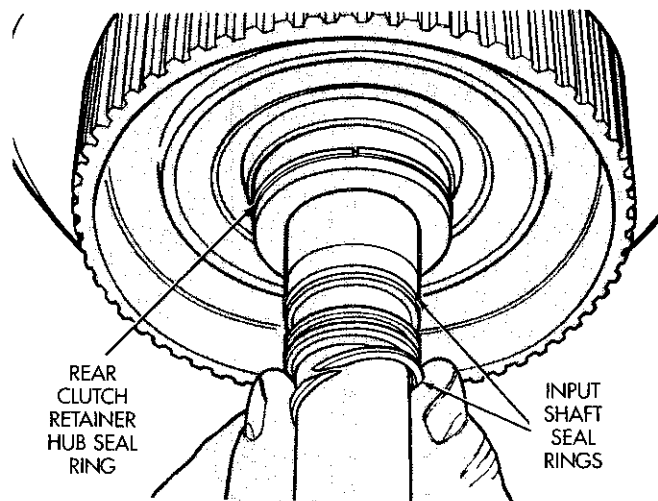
Rear Clutch Retainer And Input Shaft Seal Ring Installation
